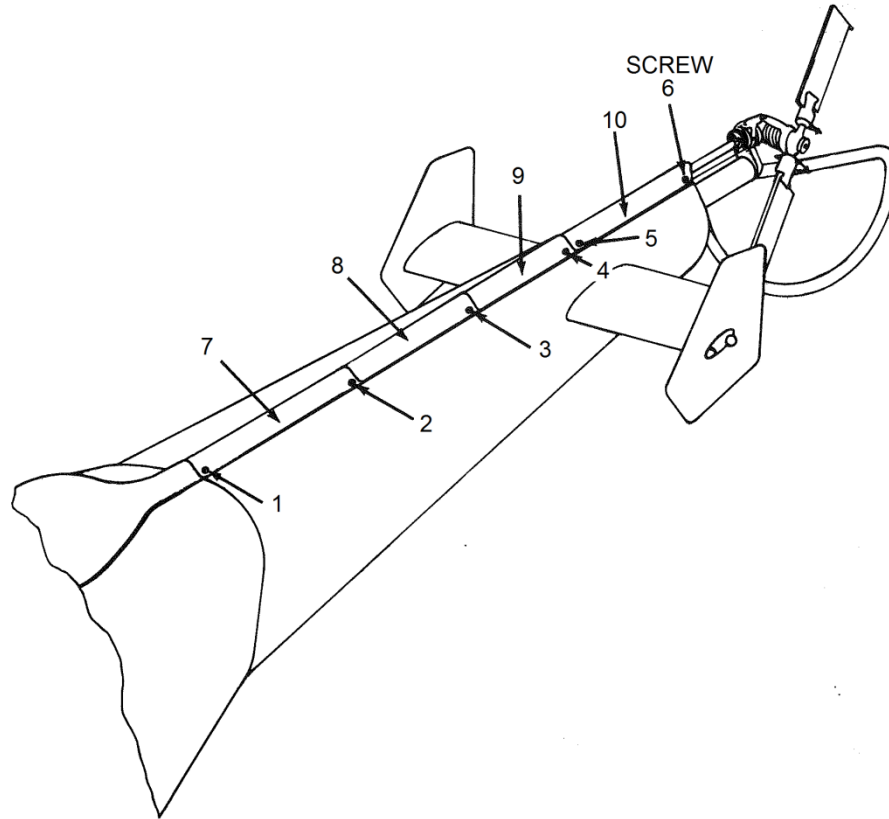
Tail Rotor Driveshaft Cover (280 FX)
